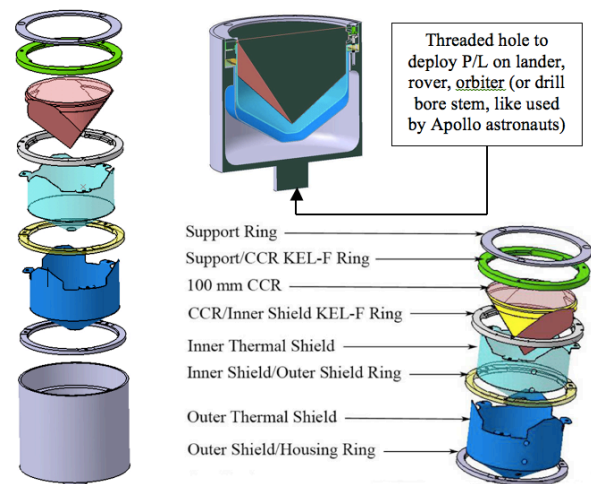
Drawings of the LLRRA-21/MoonLIGHT CCR with its internal mounting rings, thermal shields and aluminum housing. Current, upgraded shields have a shape conformal to the CCR, instead of the conical shape shown above.
